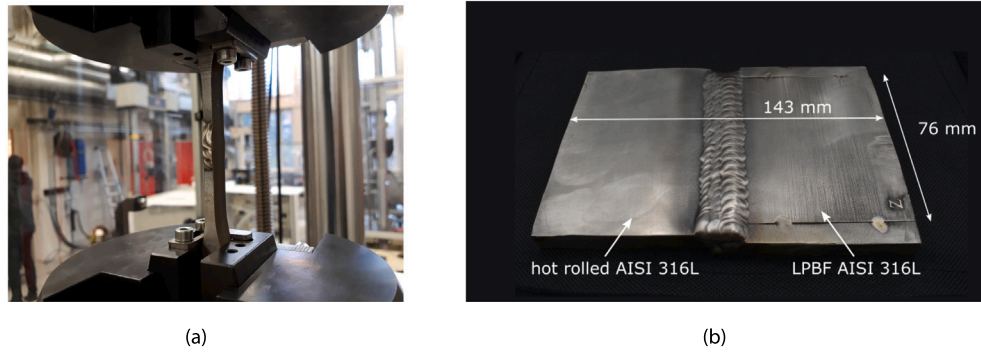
Testing layout: (a) fatigue samples, (b) production plate.
